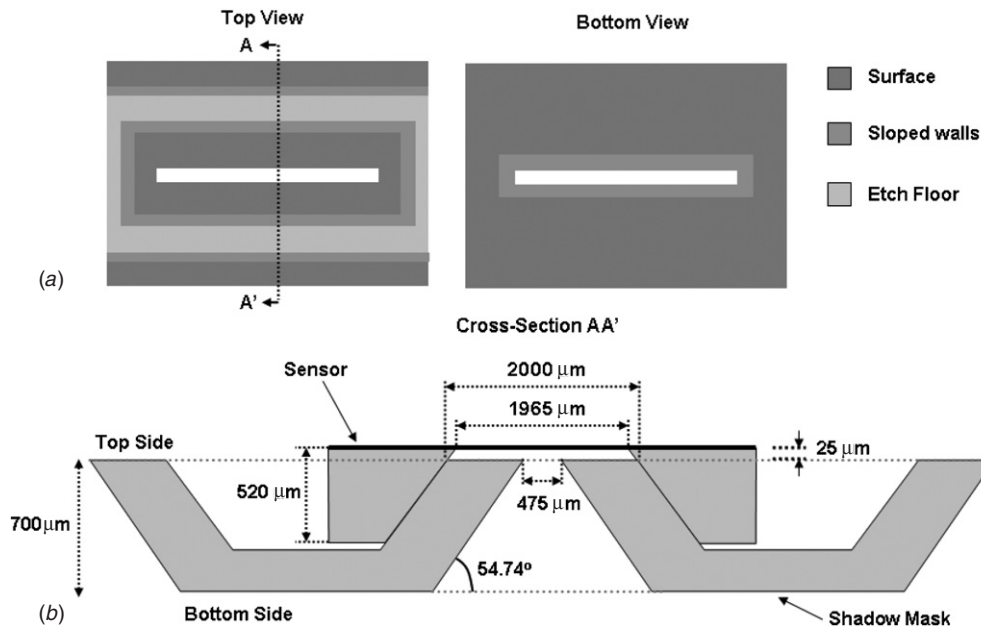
Design of the shadow mask. (a) Top and bottom views. (b) Cross-sectional view of the sensor resting on the shadow mask. Desired critical dimensions of the shadow mask are shown.
